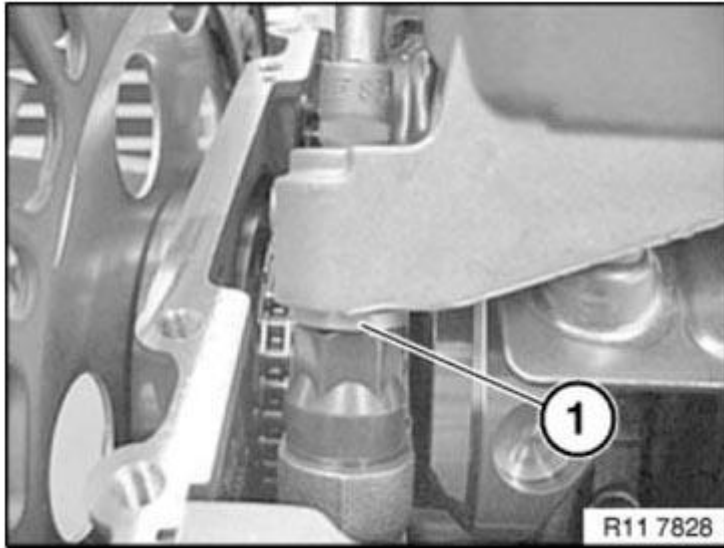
Pretensioning Oil Pump Adjusting Sleeve With Hexagon Socket Wrench
